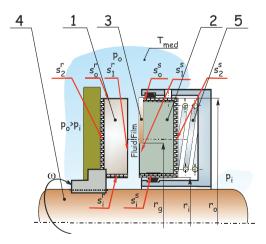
Schematic diagram of a seal with microstructures on the end face of the stator 1, 2 - seal rings, 3-face grooves, 4- shaft, 5-spring
